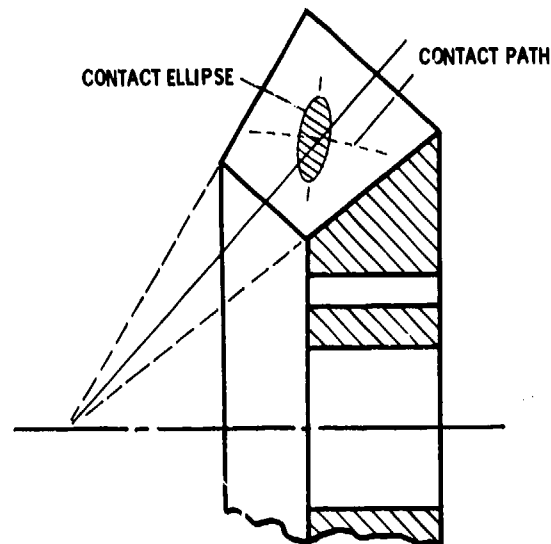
Spiral bevel gear tooth showing features of tooth contact geometry.
